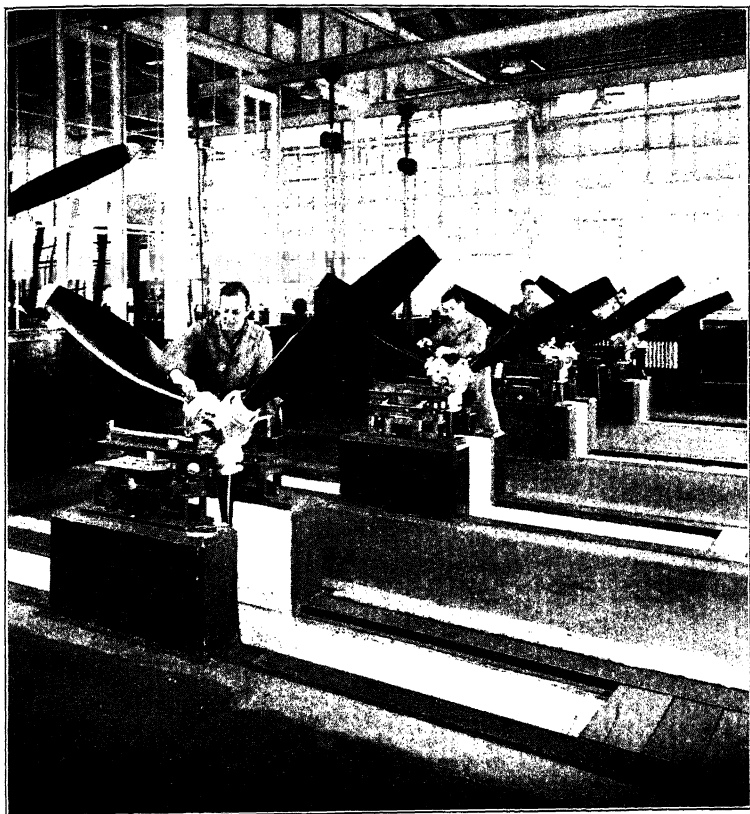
Balancing complete propeller assembly. (Courtesy Curtiss Propeller Division, Curtiss-Wright Corp.)
